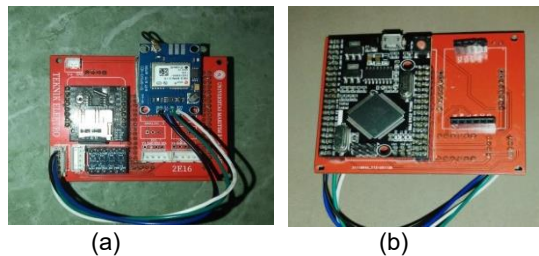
Part of the PCB (a); Top Part (b) Bottom Part
